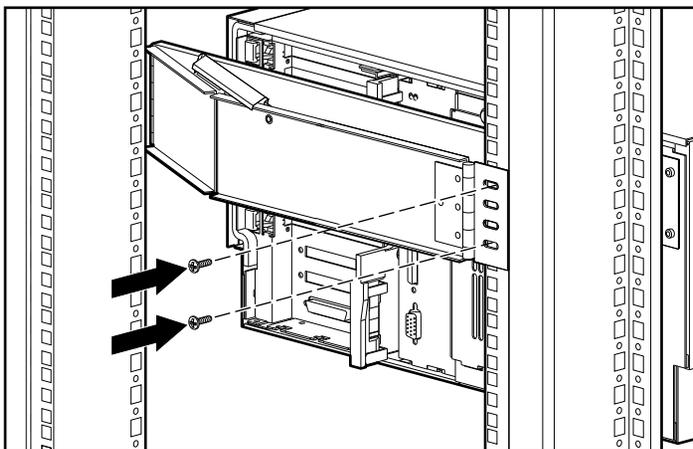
Attaching the cable management arm to the rear brace of the rack
